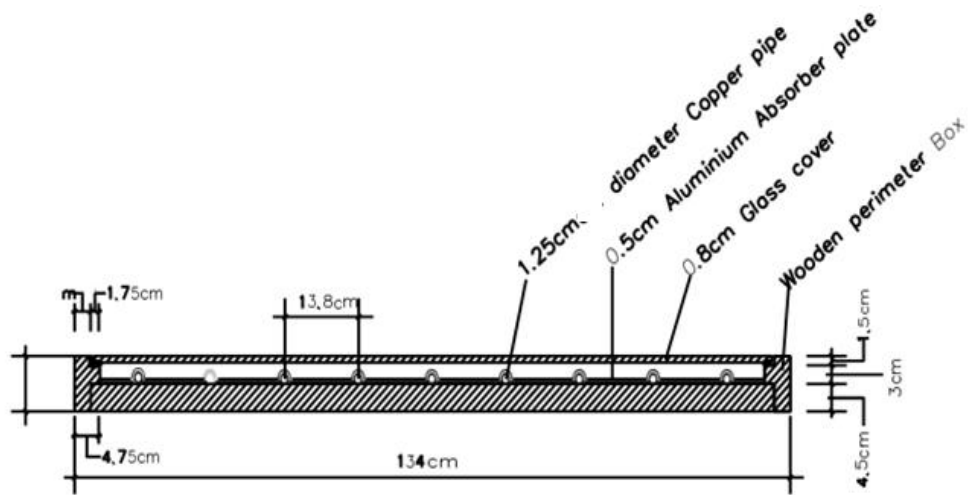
Cross-section of our constructed solar collector with detailed dimensions
